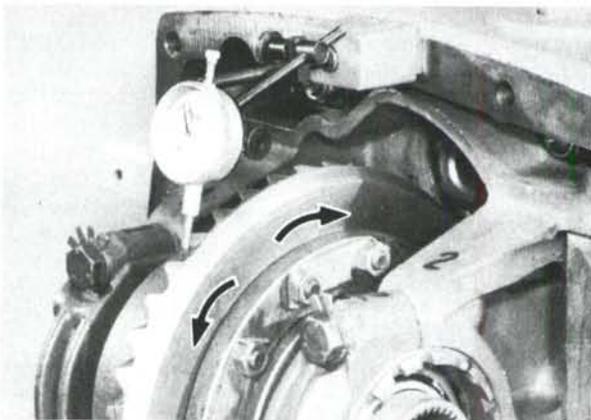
Mount a dial indicator so probe contacts ring gear tooth as shown to measure bevel gear backlash.
